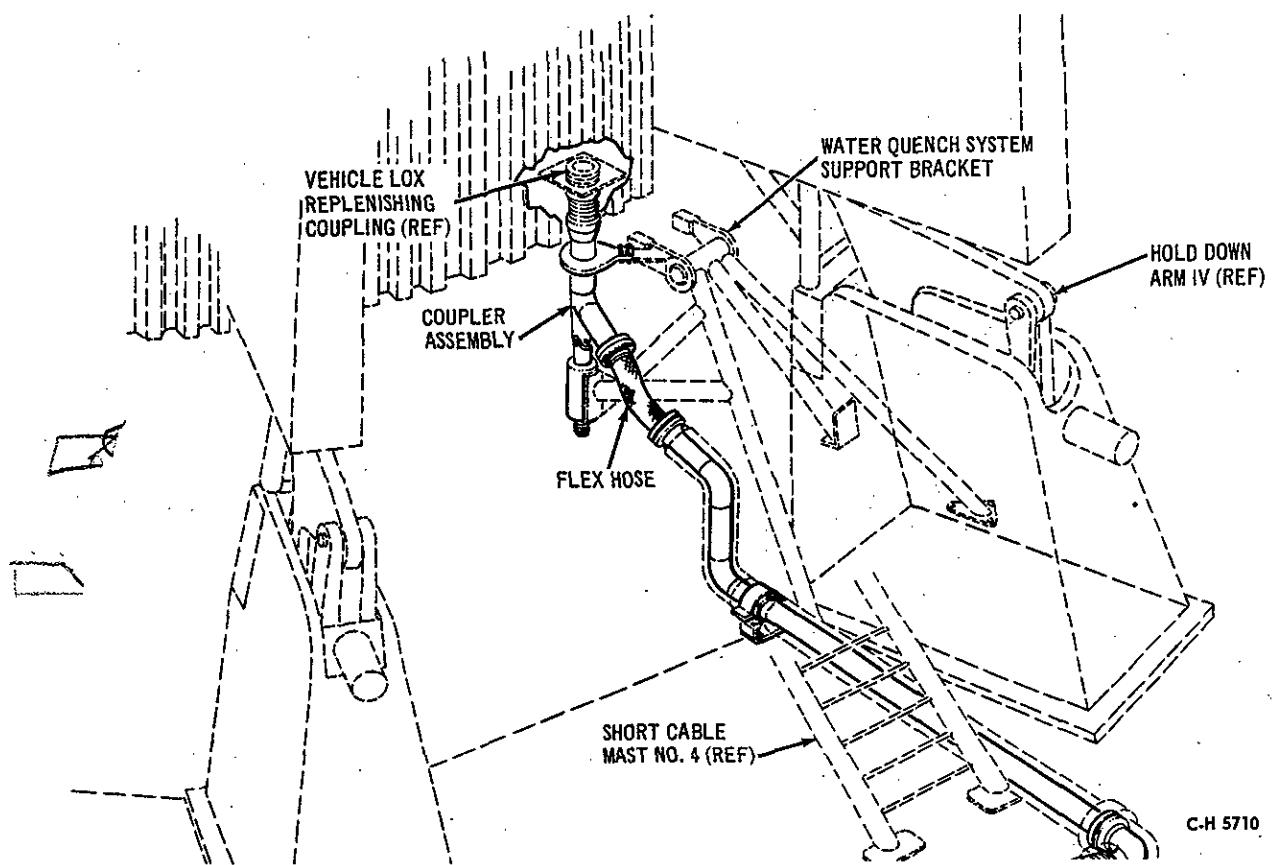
Lox Replenishing Coupler Assembly Installation (Block II)
